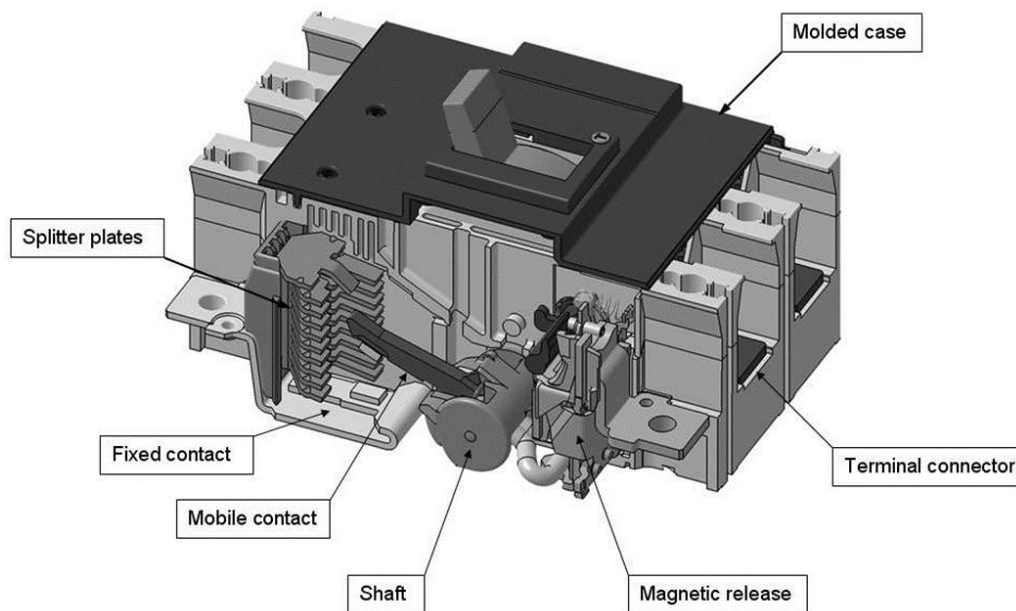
Principal parts of a Molded Case Circuit Breaker [22].
